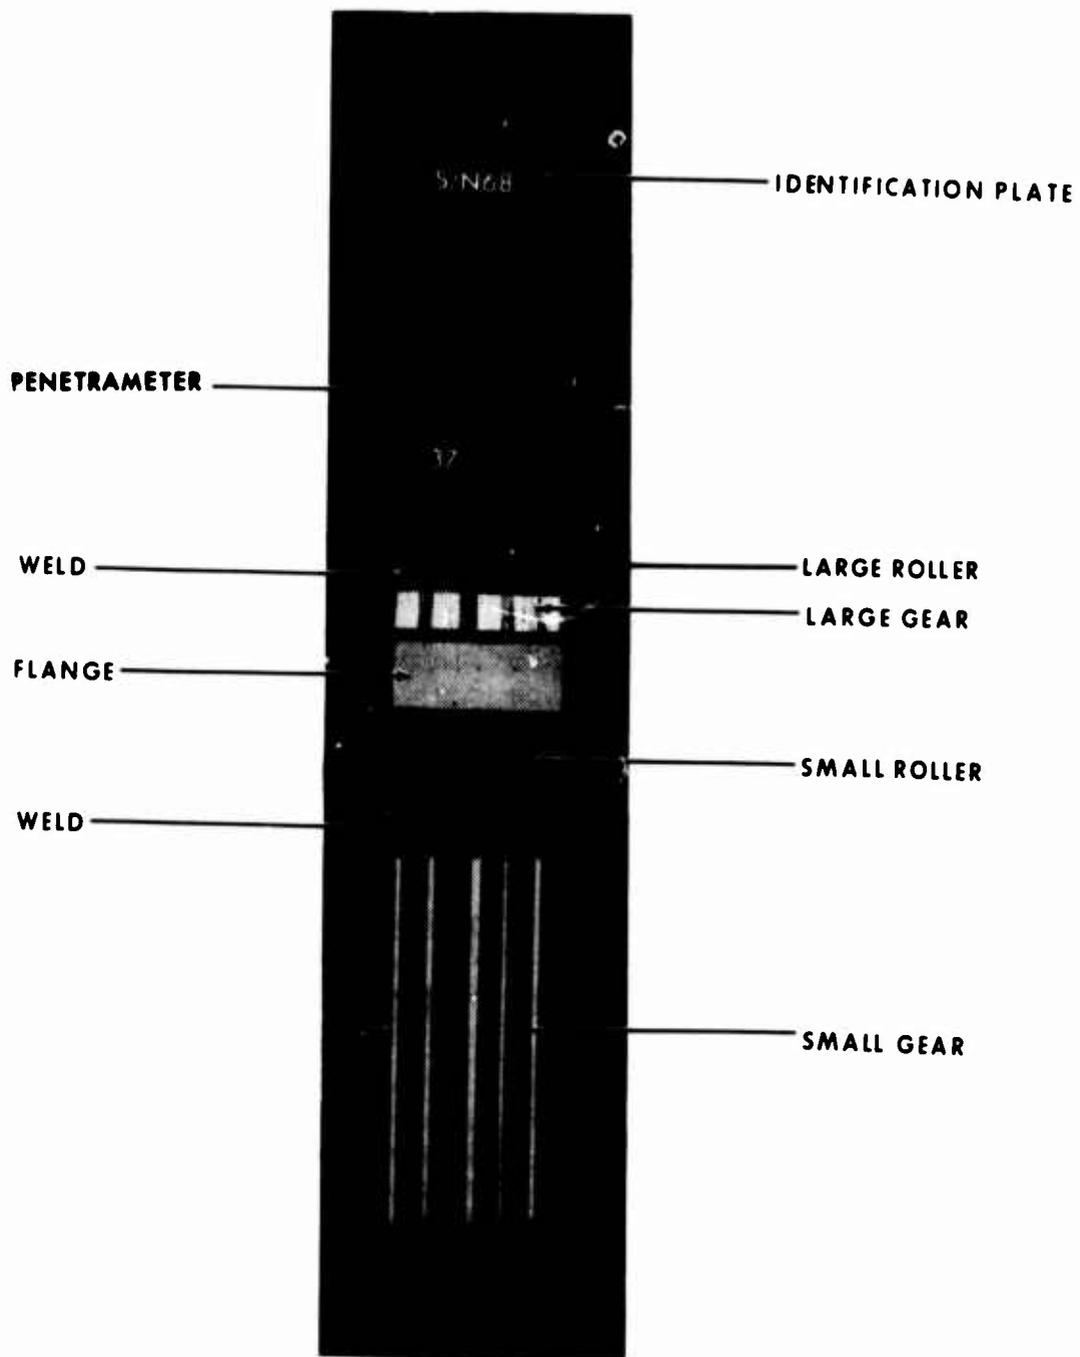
Representation of Radiograph Produced in Inspection of First-Row Pinion Butt Weld.
